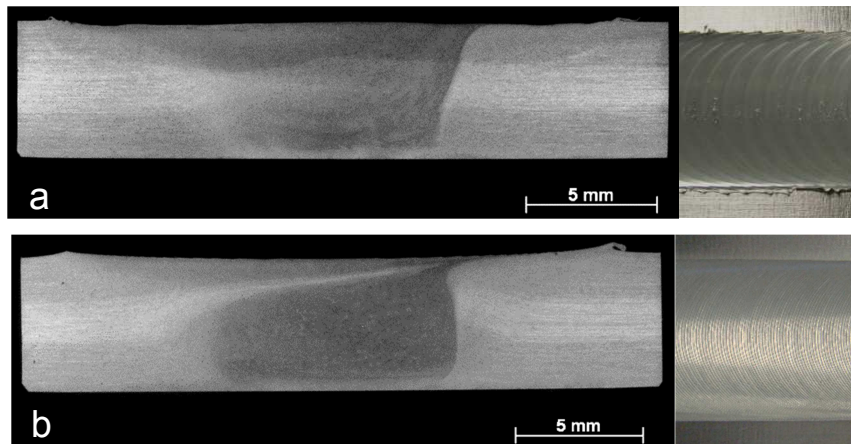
Macrograph and surface appearance of the fast and slow welds, both made with a spindle speed of 500rev/min (a) “W9” [1500mm/min] (b) “W10” [200mm/min].
